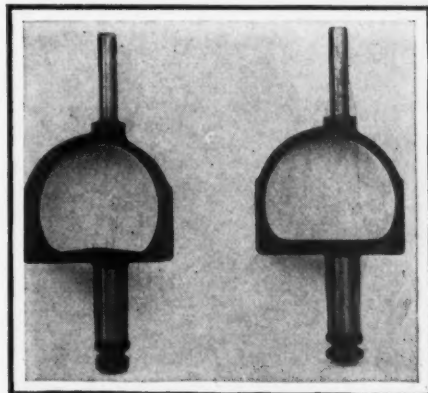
VALVE LIFTERS USED ON PEUGEOT
